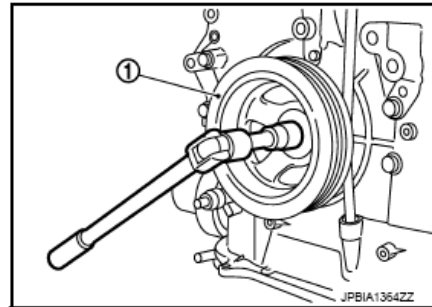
Loosening Crankshaft Pulley Bolts Using Tool
